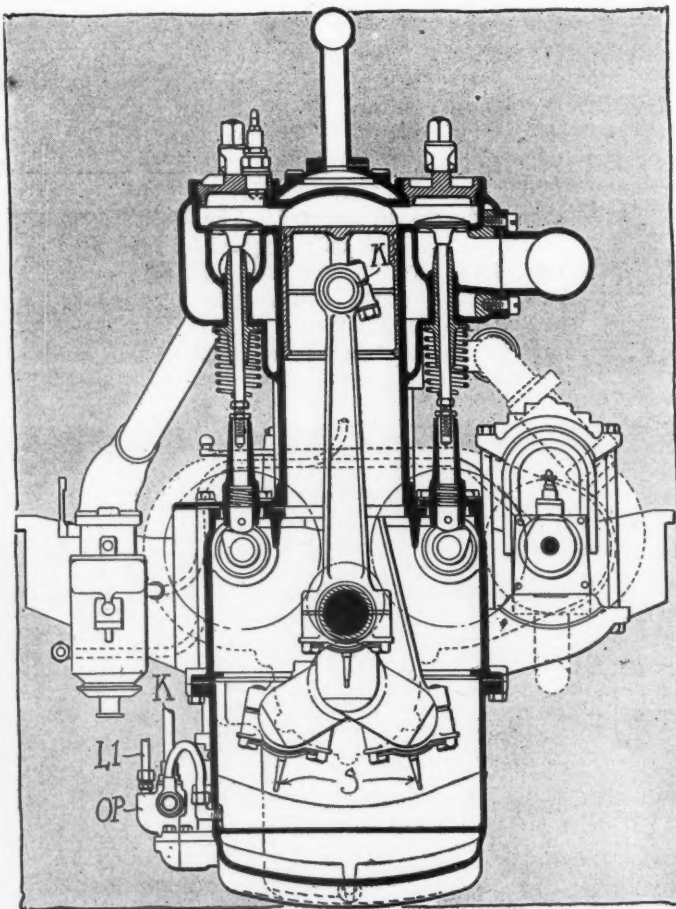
VERTICAL END SECTION OF PREMIER 1911 MOTOR
